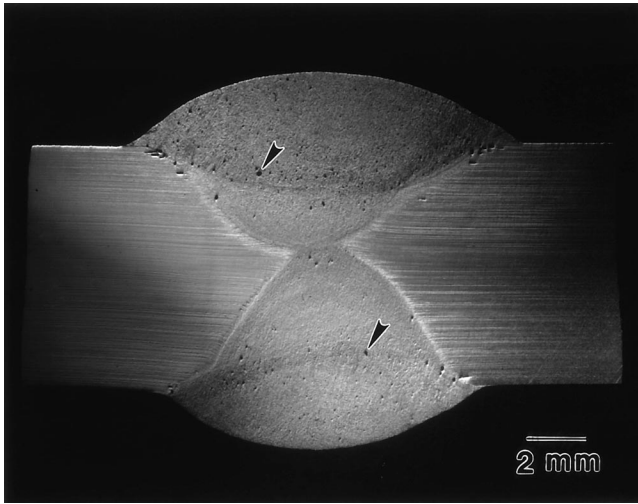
Macroscopic profile of the 2195 welded joint, made with a 4043 filler metal.
